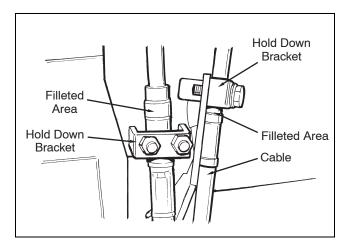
E-3. Attach Cables to Shifter Mounting Bracket
